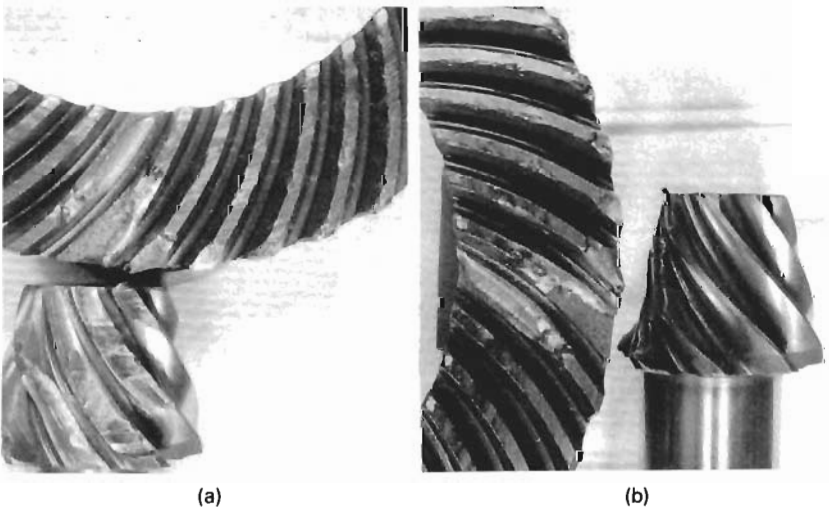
Spiral bevel gear and pinion set, 1.5 \times . Sheared in reverse direction. The pinion came to a sudden and complete stop at the instant of a primary failure of the unit, allowing the gear to shear the contacting teeth and to continue rotating over the failed area.
